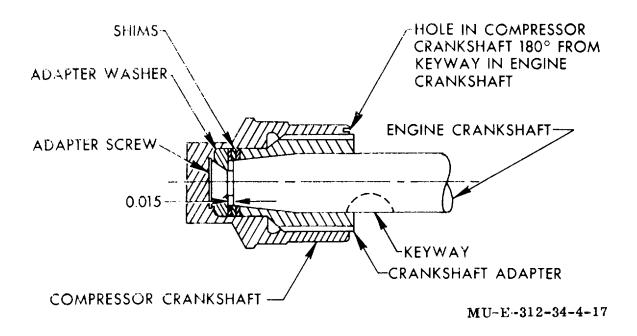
Crankshaft-adapter shim determination, and compressor crankshaft and engine crankshaft orientation.
